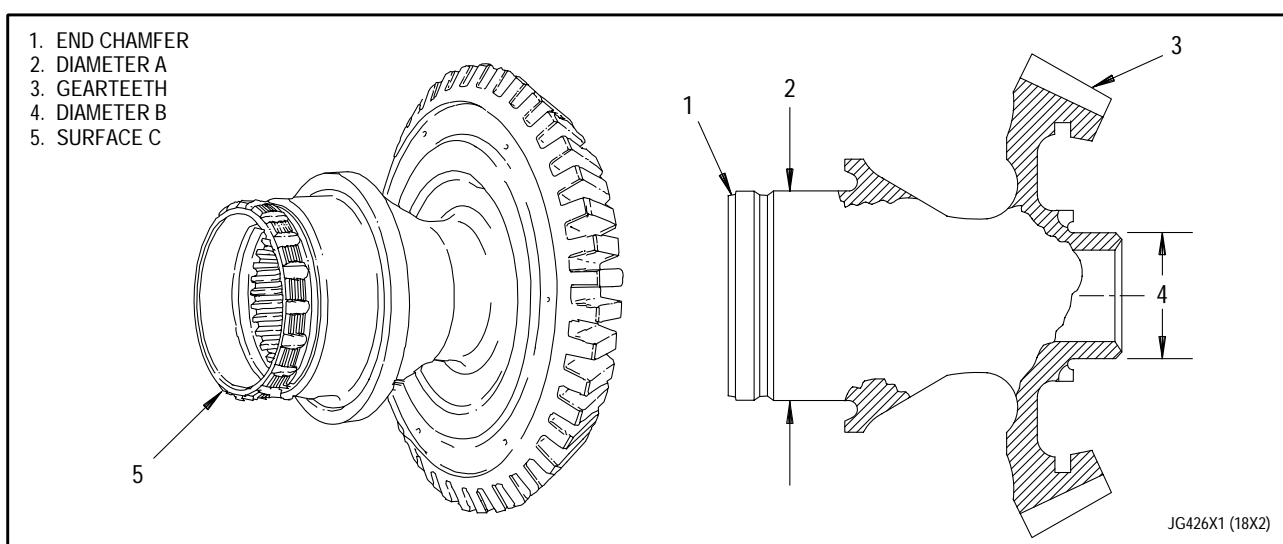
Gearbox Drive Bevel Gearshaft (38 Teeth) - Gearteeth Repair
